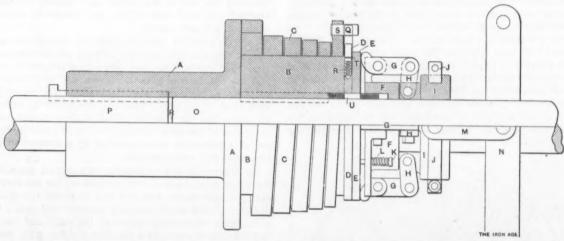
Elevation, Partly in Section, Showing the Double Friction Coll Clutch with Protecting Case Removed, and in Its Engaged Position.
